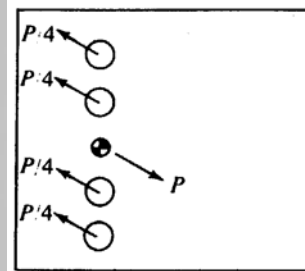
Eccentrically loaded bolted connector loaded in shear
